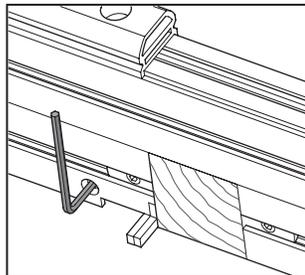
Sliding key initial setting for 1/4" (6mm) and larger finger joints.
